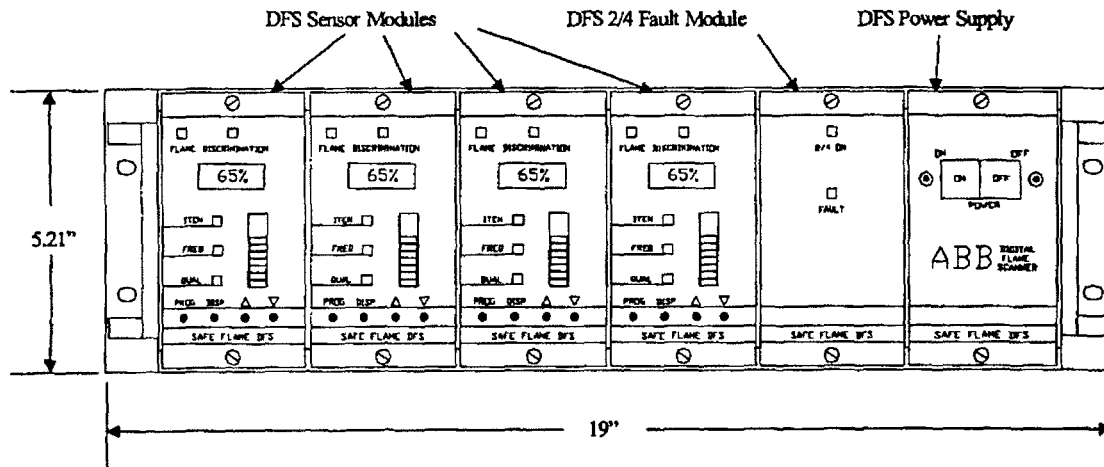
Safe Flame™ DFS Rear Access, 4 Channel Chassis
